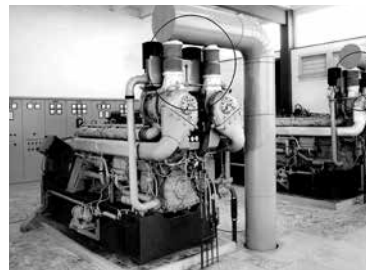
Axial expansion joints used on superchargers of diesel engines
